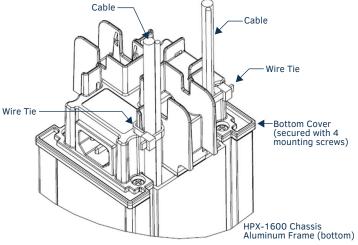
BOTTOM COVER - INSTALLED WITH CABLES EXITING AND SECURED
